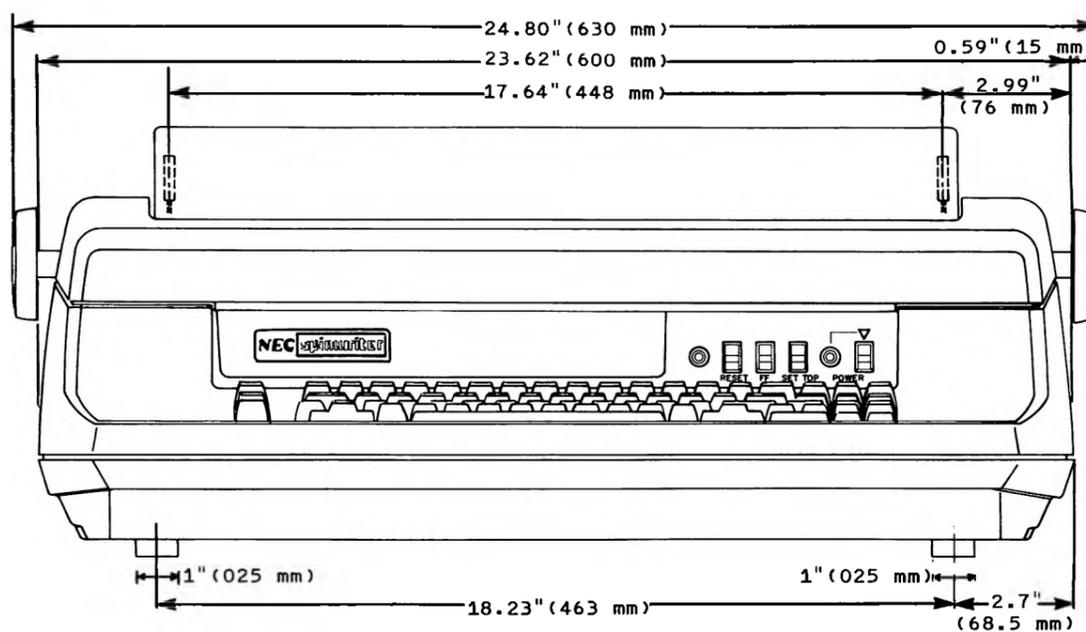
Models 5520 and 5525 SPINWRITER Dimensions, Front View
